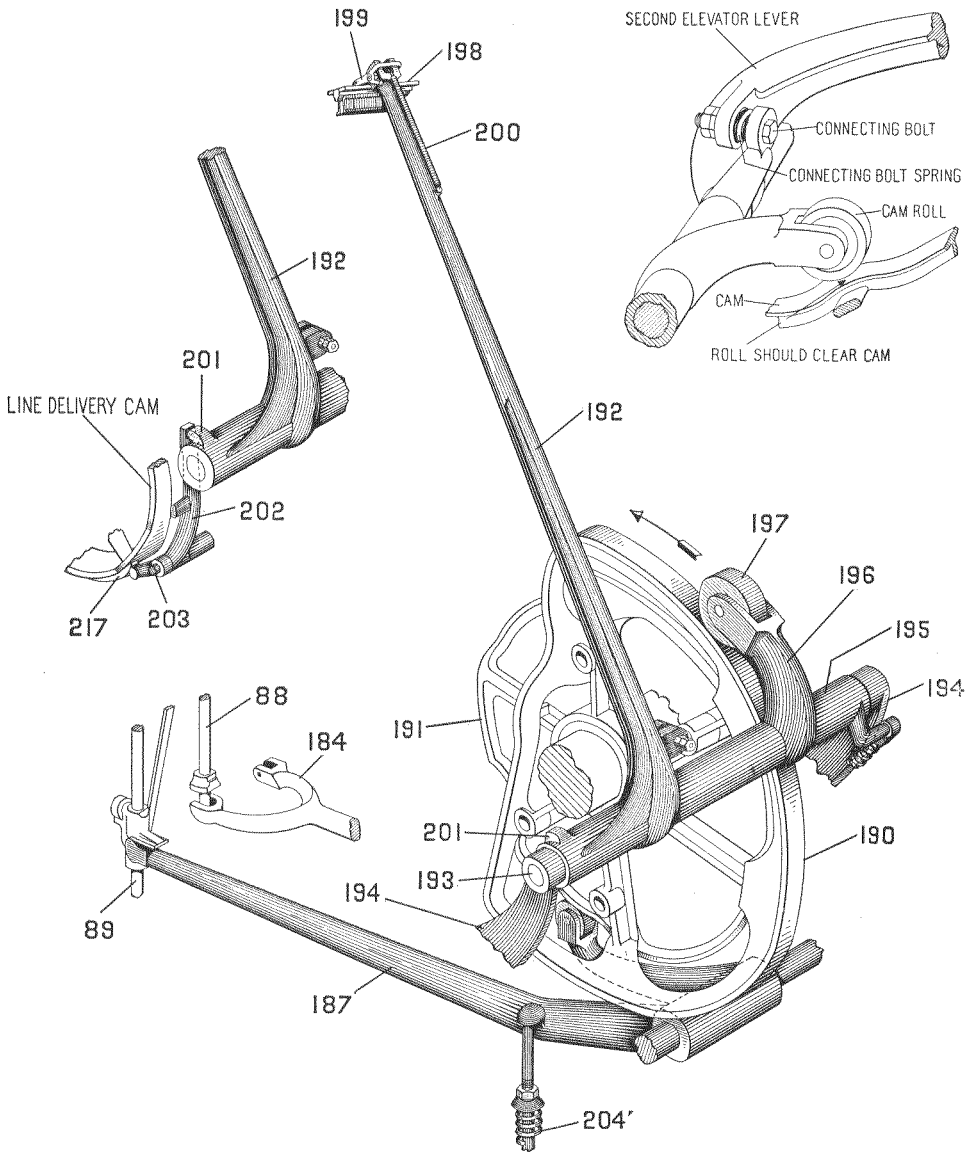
View of the second-elevator lever cam 190 and the justification cam 191. These two cams are in one casting. The second elevator 192 is mounted on a shaft 193 supported by bearings 194 which fasten on to the main frame.
